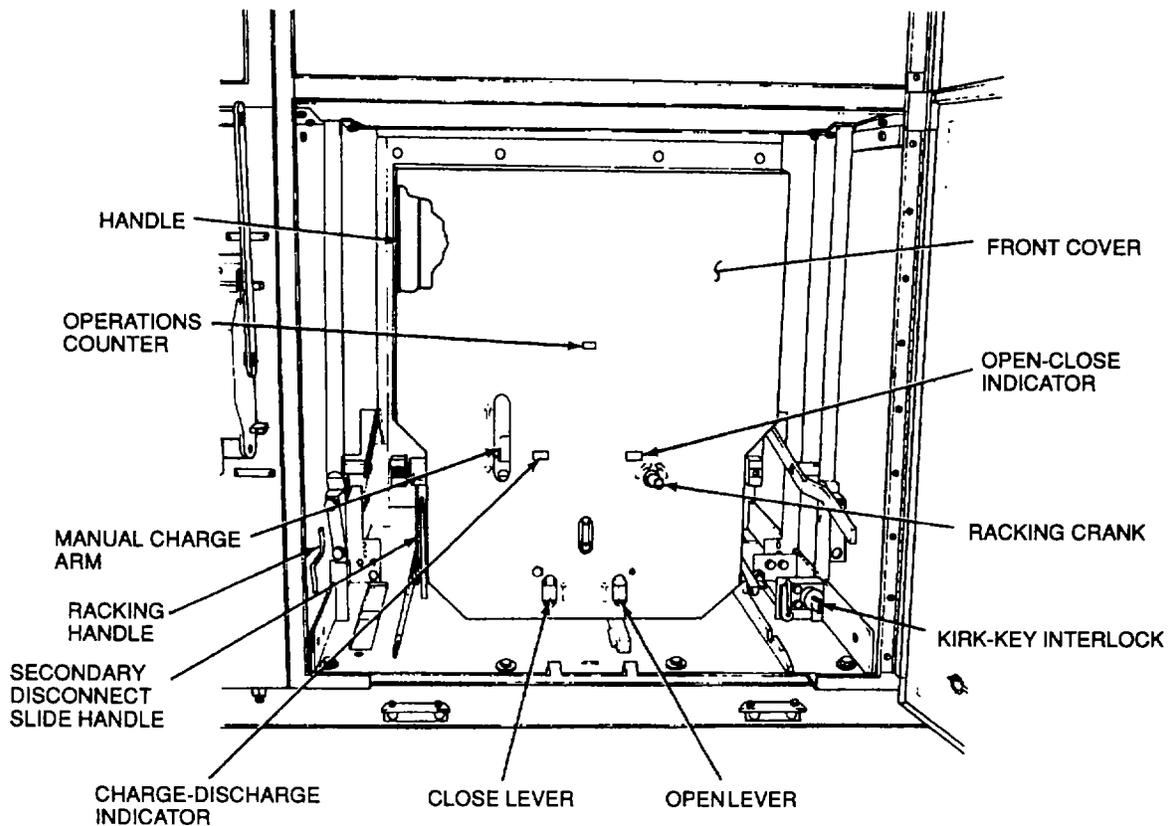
Load Circuit Breaker CB101, Front View, Installed
